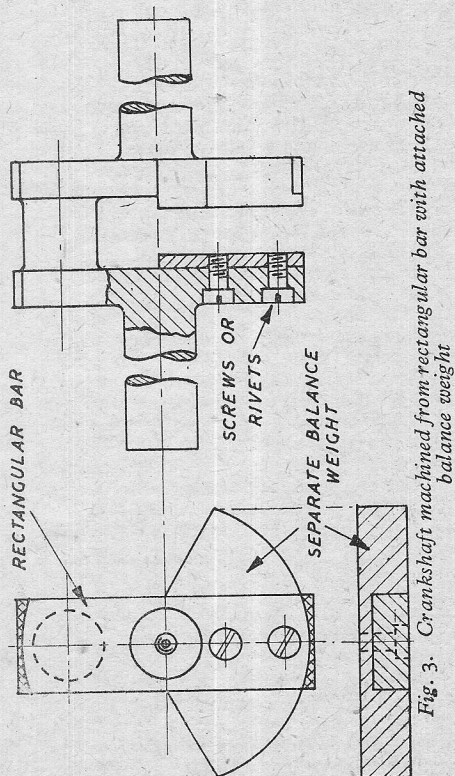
Crankshaft machined from rectangular bar with attached balance weight
